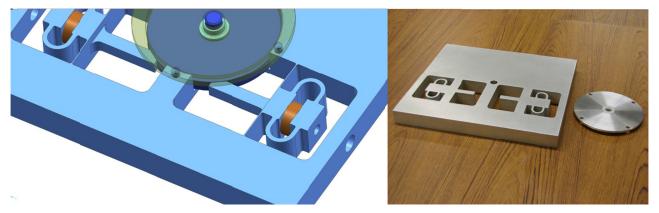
A CAD model of a prototype rotary motor that can drives a rotor clockwise and counterclockwise along with a photograph of manufactured parts. The mounting flexure and horn tips still need to be machined in the figure.
